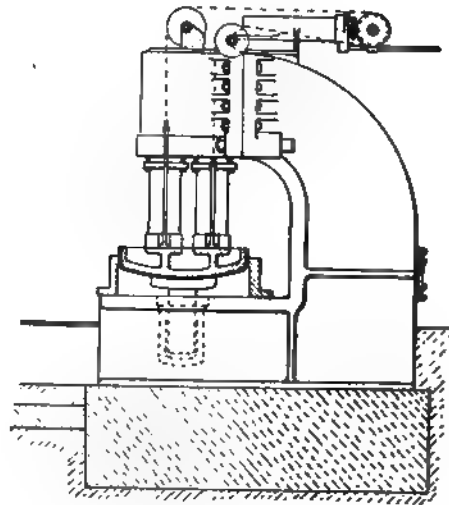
Flanging Dome Ends, with Lower Cylinder in use.
